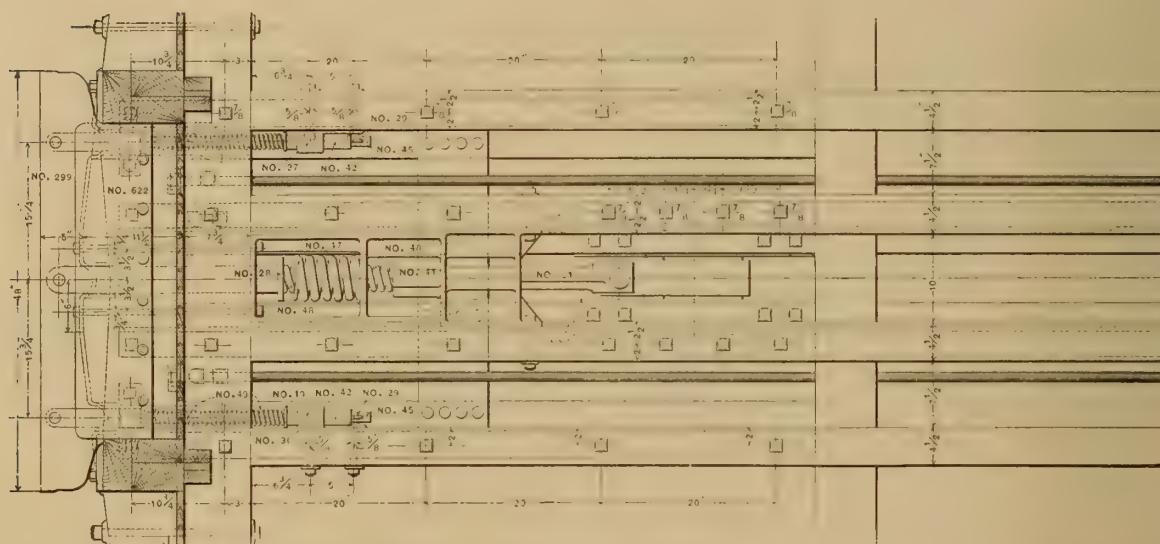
PLAN OF GOULD DUMMY VESTIBULE AND DRAFT GEAR FOR BAGGAGE AND EXPRESS CARS.
